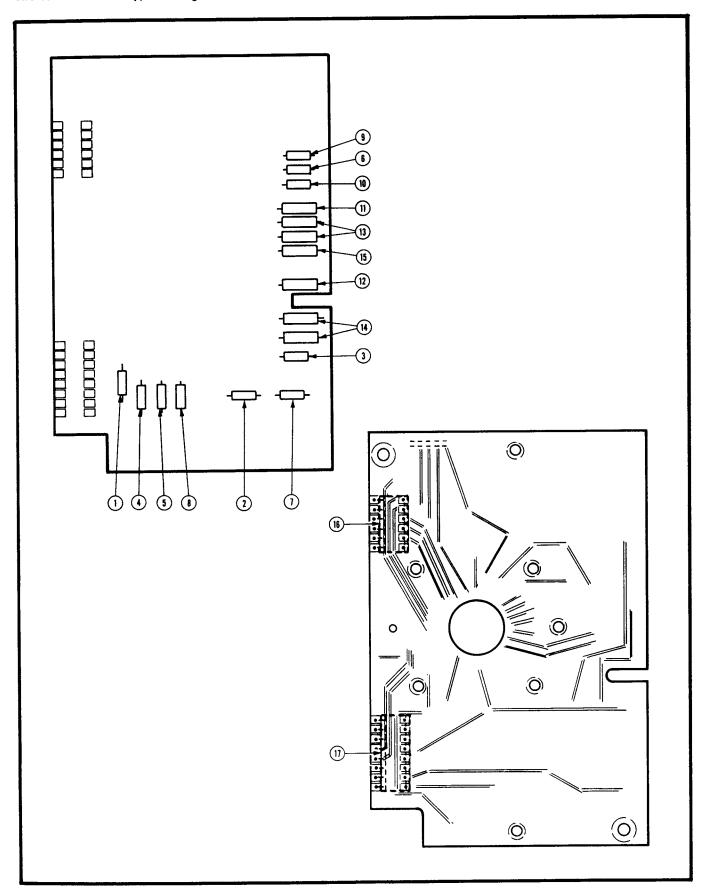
Circuit Board Assembly, A-Timing (Sheet 1 of 2).
